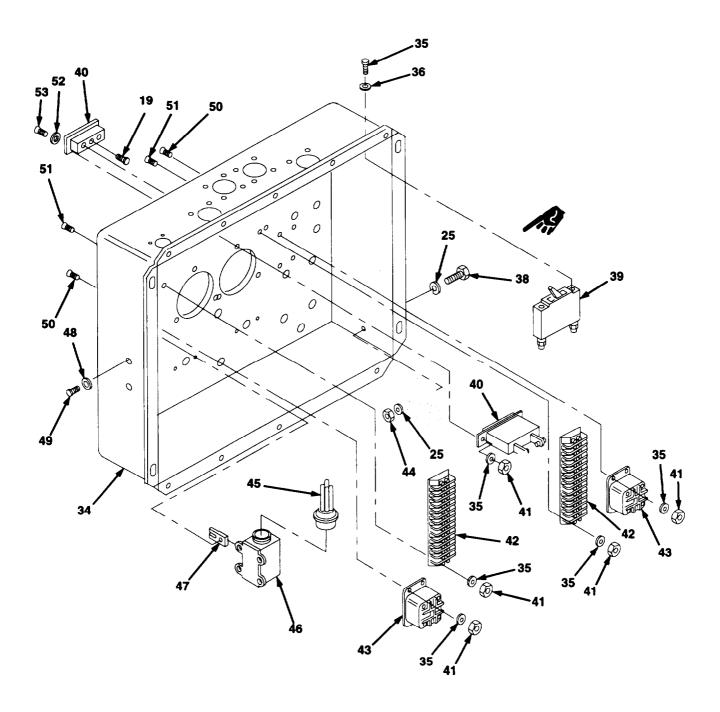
Control Panel Assembly and Panel Cover (Sheet 4 of 4)
